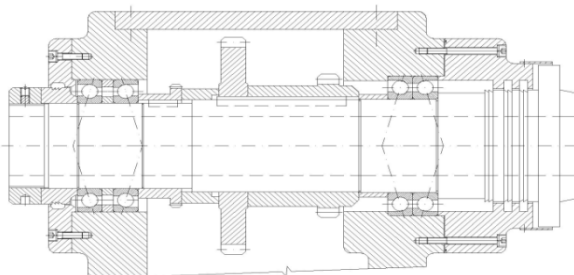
The Headstock of the precision boring machine DB 24 fy. Ex-Cell-O GmbH., Eislinger, [8]
